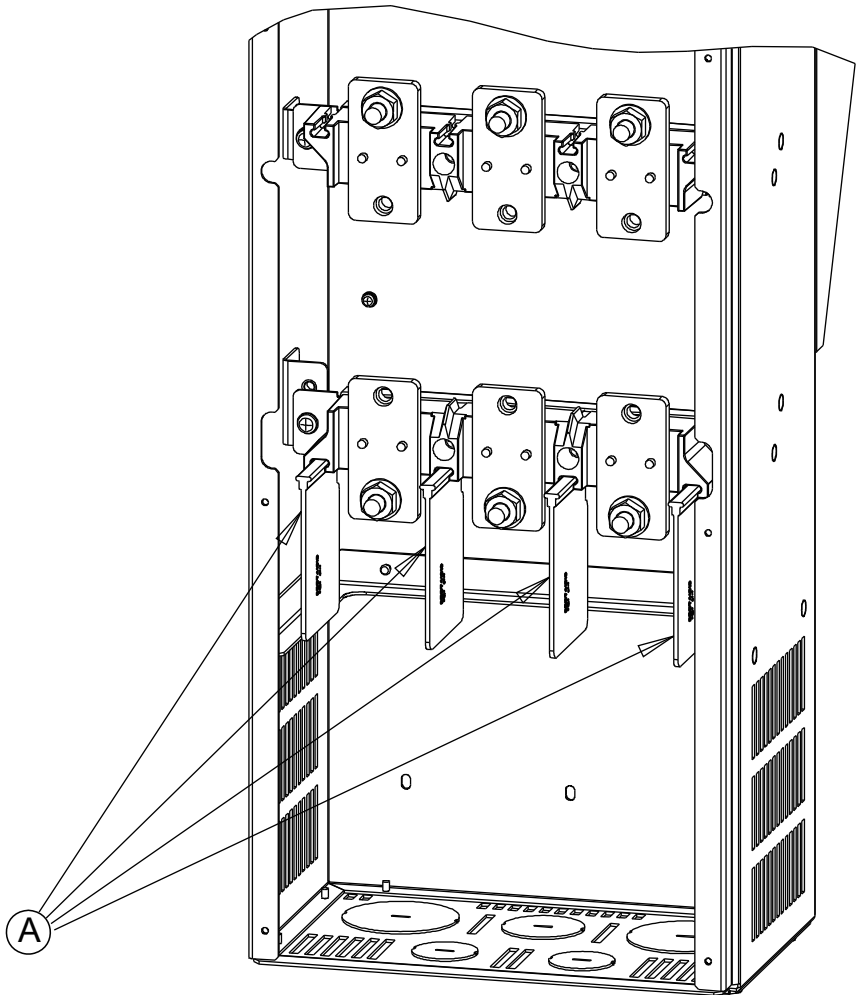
Attach the Fuse Support Subassembly to Bottom Housing
